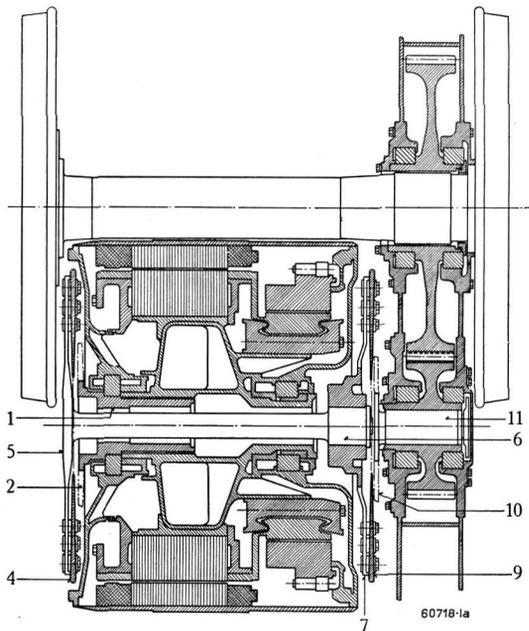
Mounting of disc drive in traction motor and pair of wheels.
